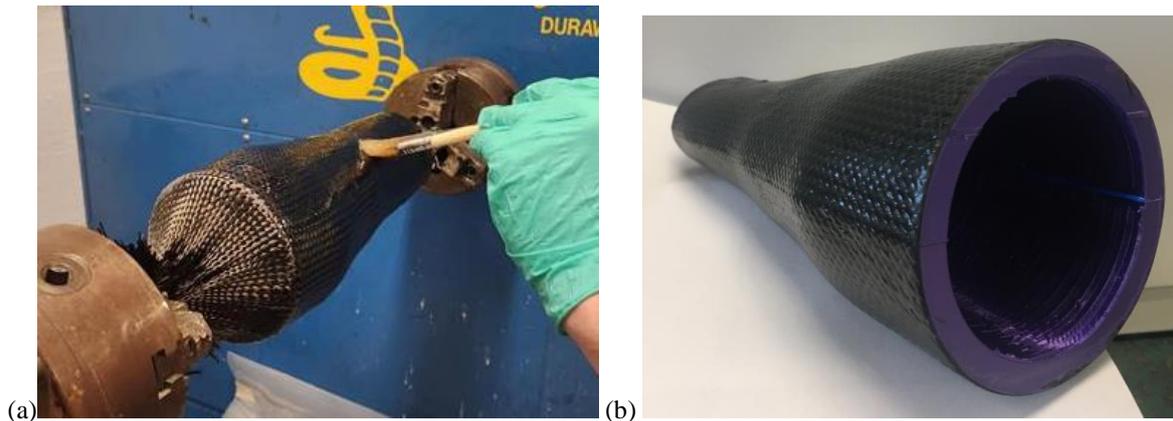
(a) Rotational epoxy molding, (b) Trimmed final part with sacrificial tooling
